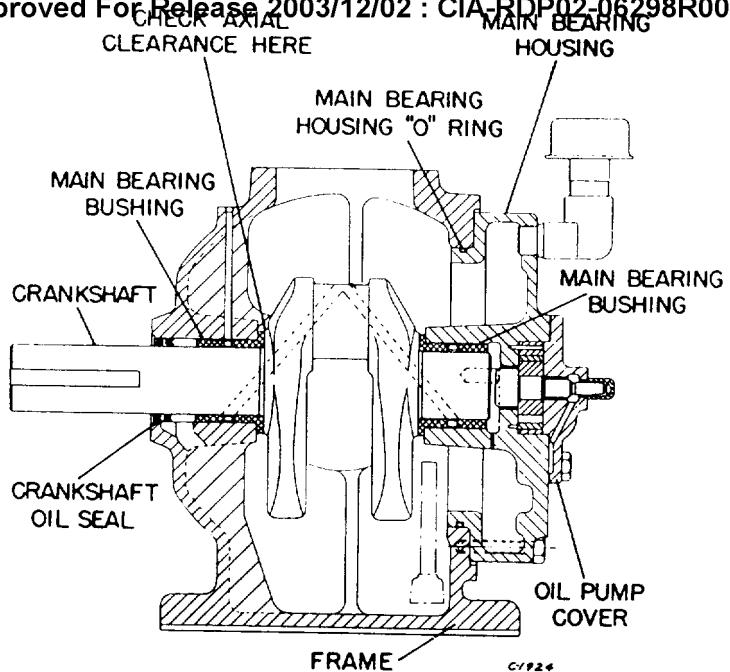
Crankshaft, Main Bushings and 5" Stroke Oil Seal
